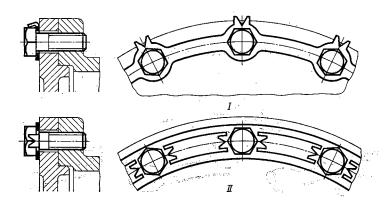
Locking of cap screws on cylindrical flanges by circular locking plates with tabs
